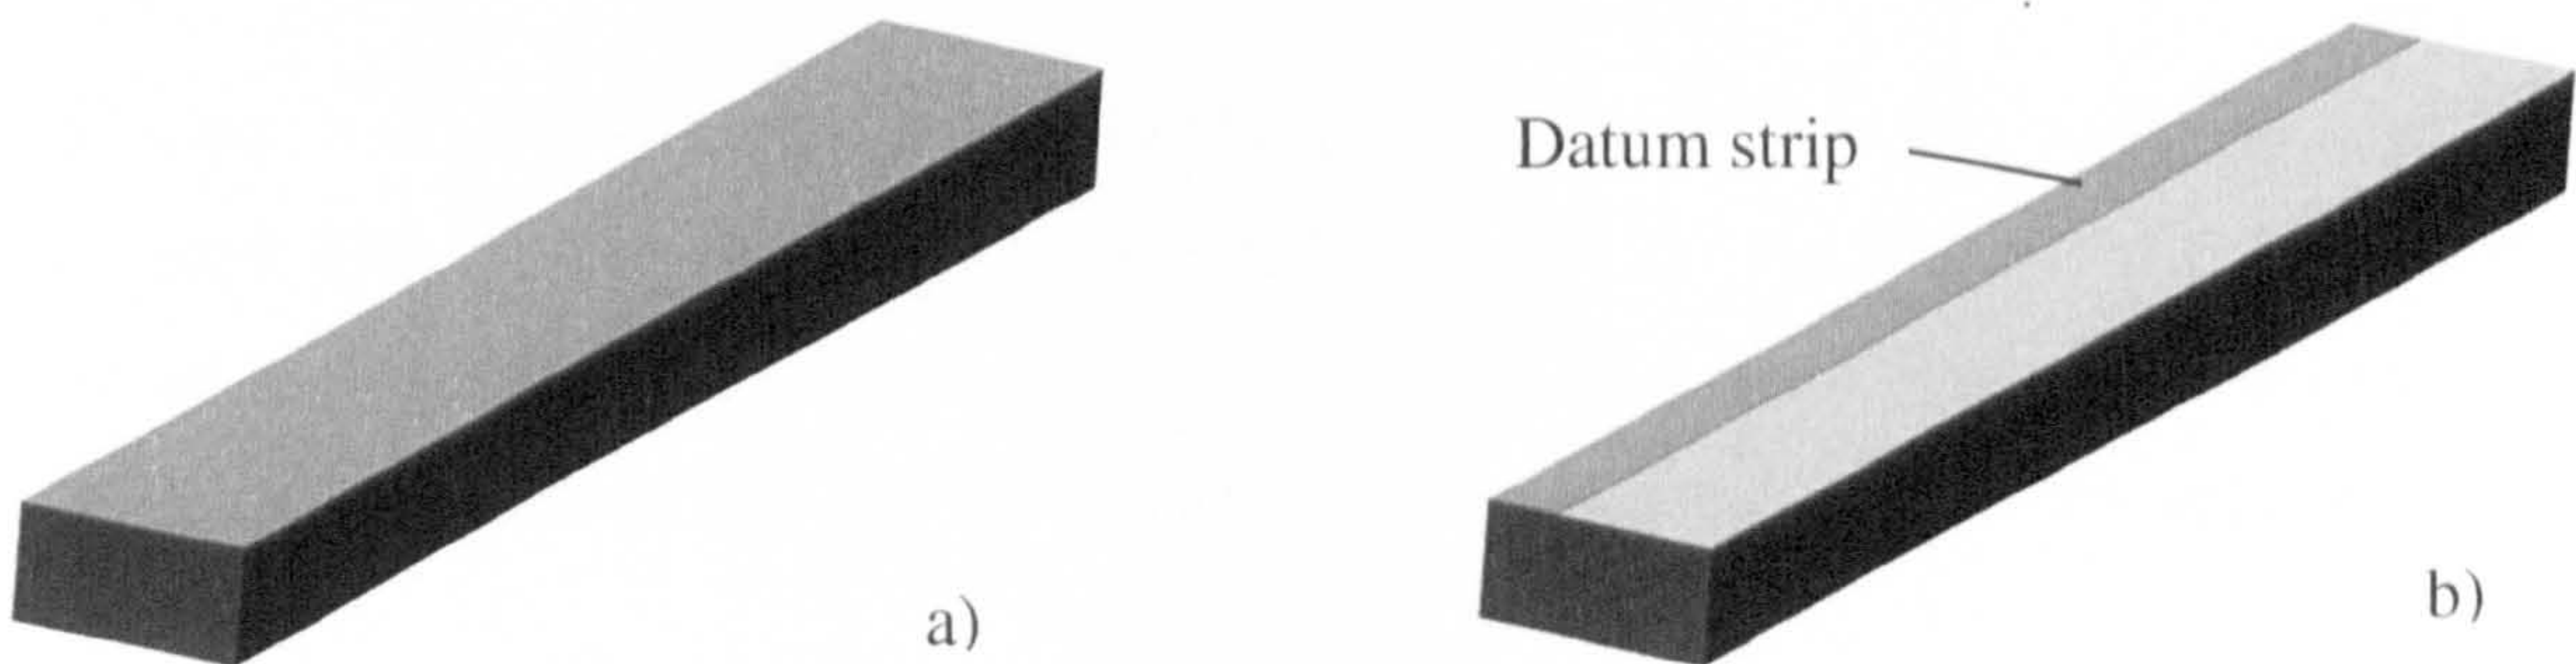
a) workpiece before test, b) after test with a datum strip left.
